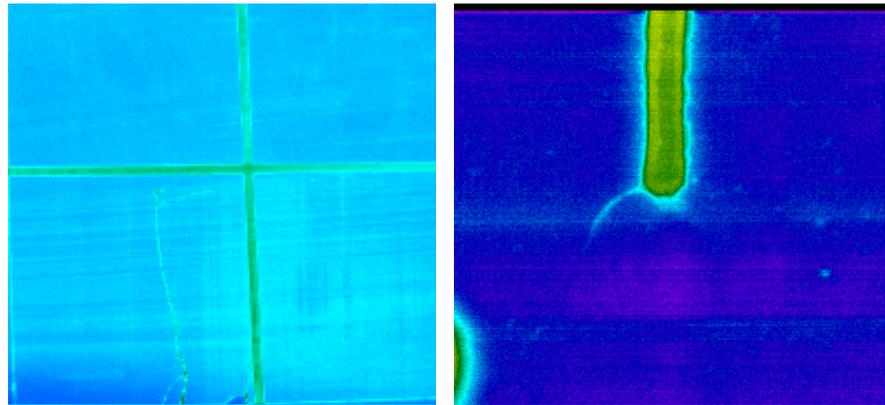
a) Centimeter size crack in a wafer, b) micro-meter size crack after laser cutting. Pictures taken by IR cameras.
